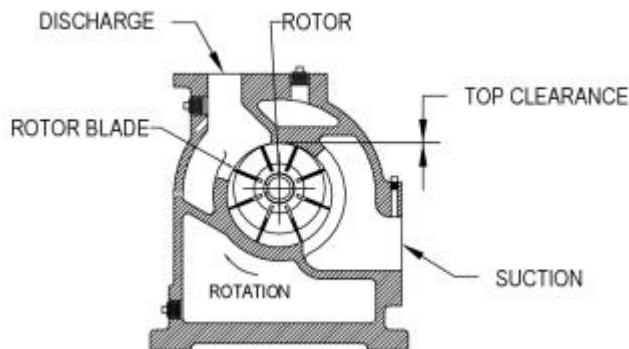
Illustration of top clearance between rotor and cylinder (High Pressure models).
